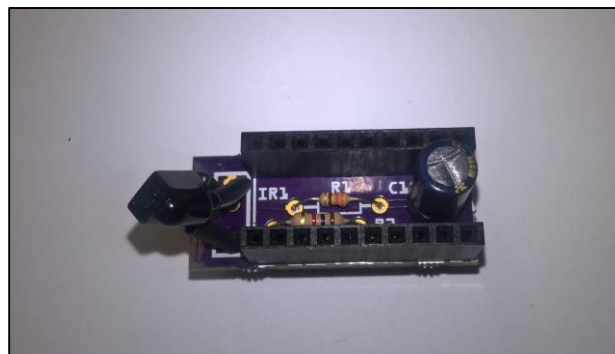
Completed PCB8 Part 4c, IR add-on PCB
